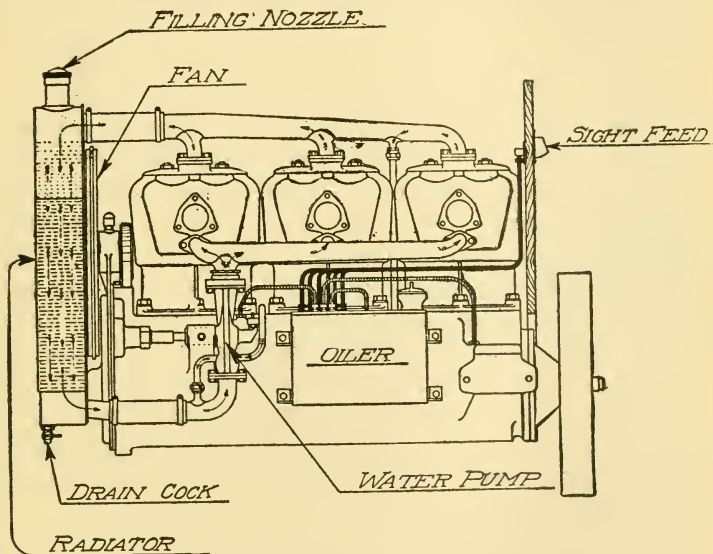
Thomas engine installation. At the side is seen the water pump and lubrication system; the figure also illustrates the connection between the pump and the water jacketed carburetter for warming the mixture in cold weather.
